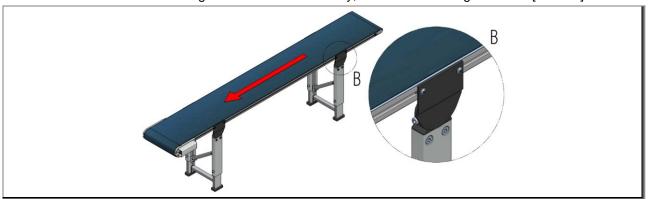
Overall construction assembly, conveyor with support AM 920 (typical)
